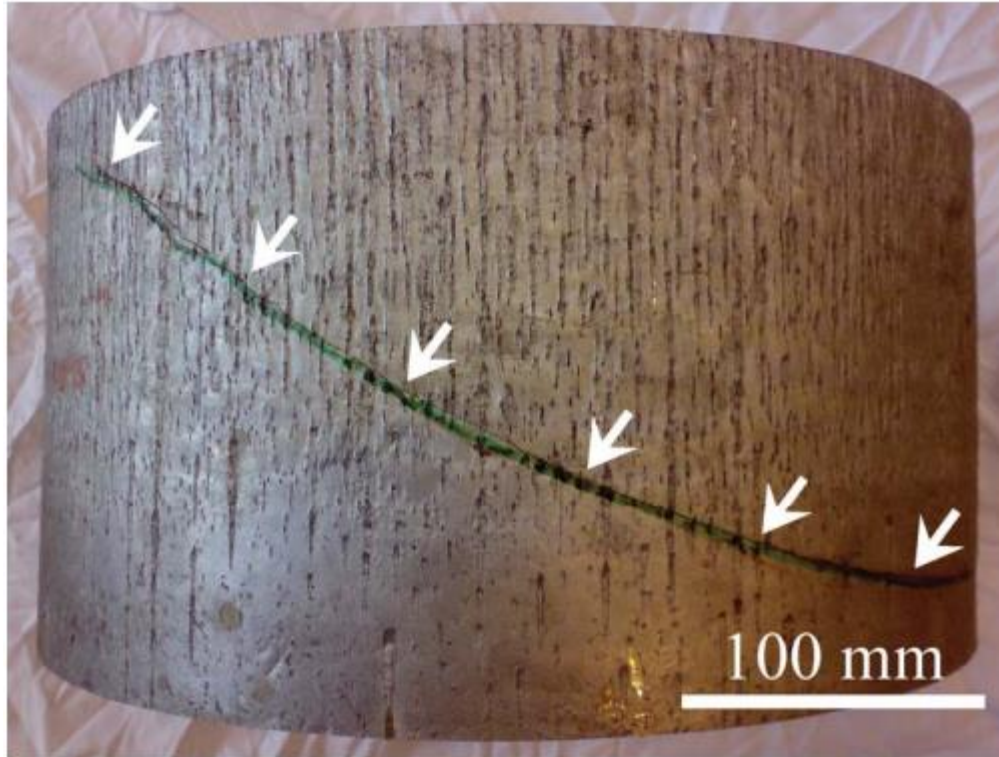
Photograph showing an example of a cold crack in a DC cast 7xxx-series billet [32].
